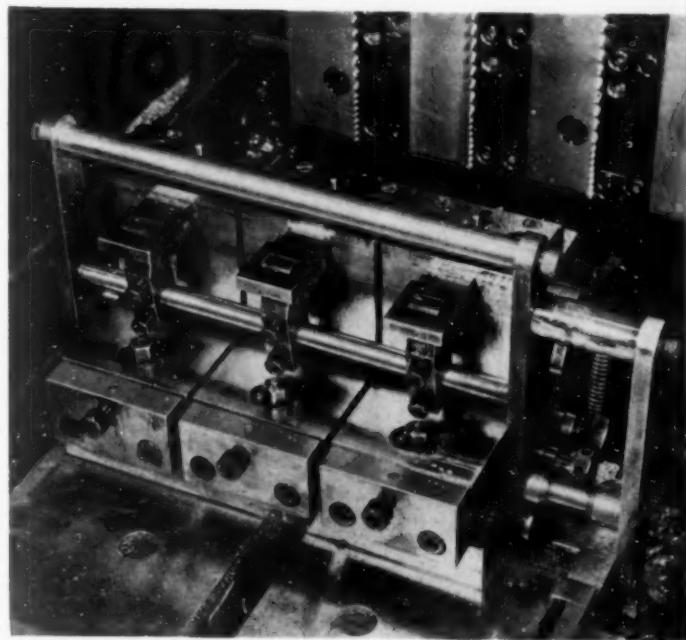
(below) Twin ram broaching machine used to form keyways. Fixtures at left are ready for loading, those at right ready to be retracted and unloaded.
